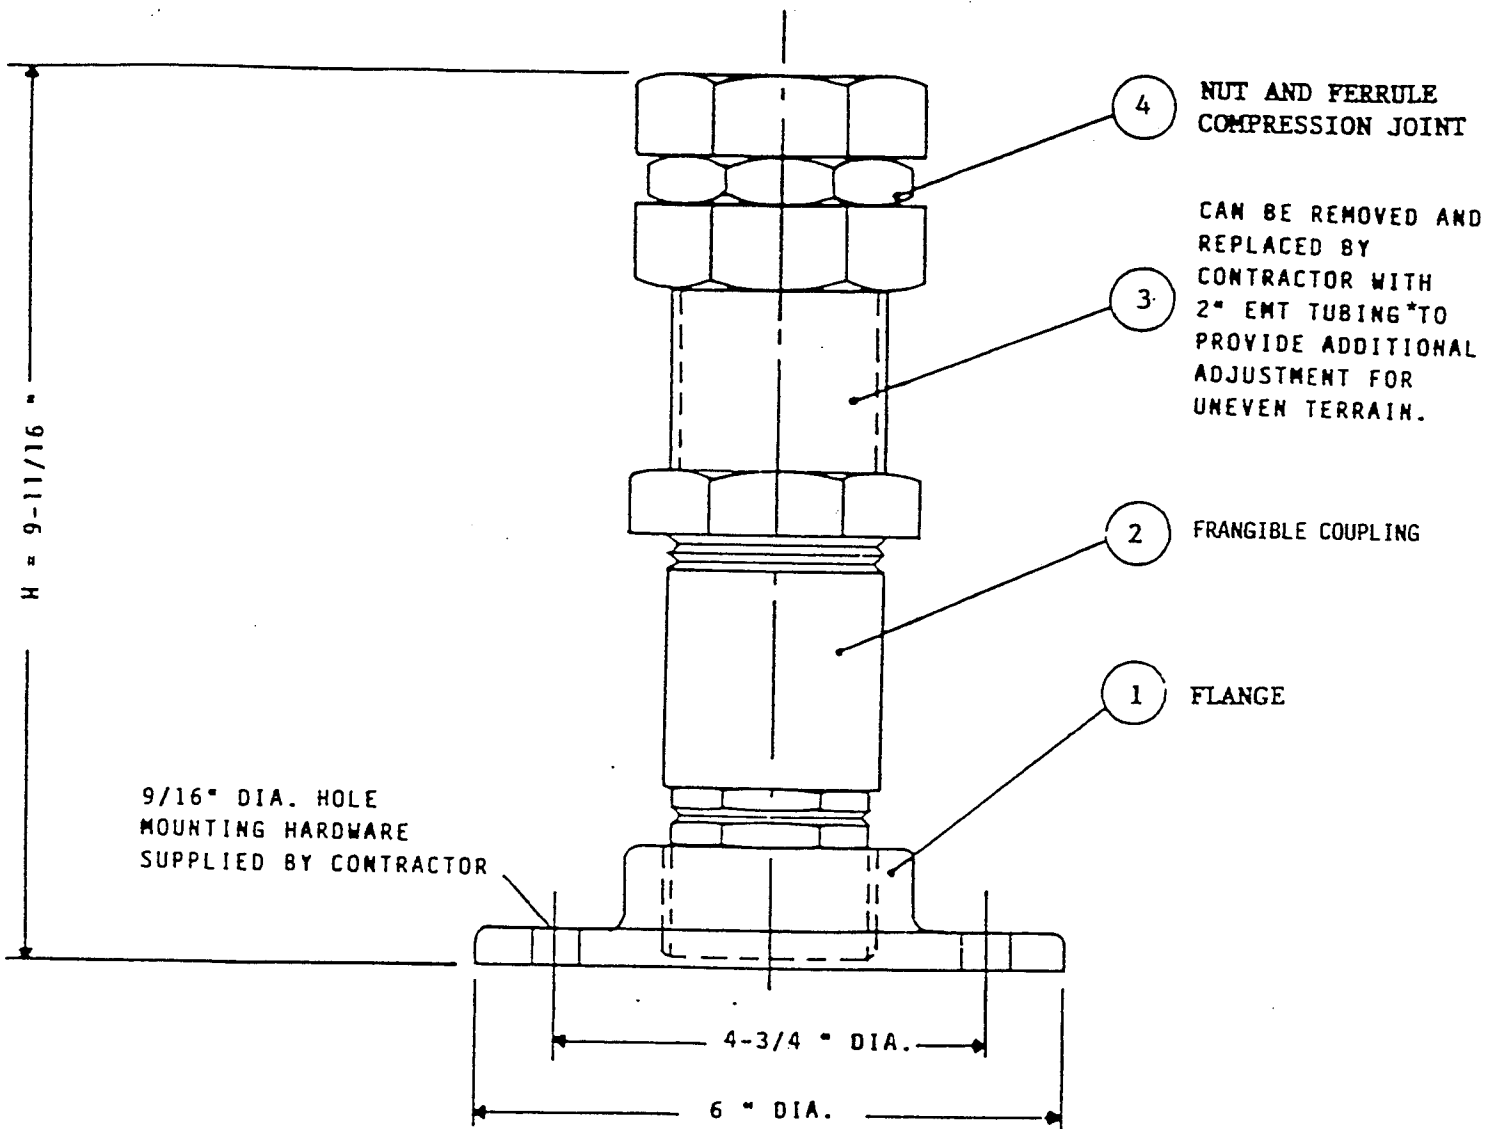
OLD STYLE ADJUSTABLE LEG ASSEMBLY
